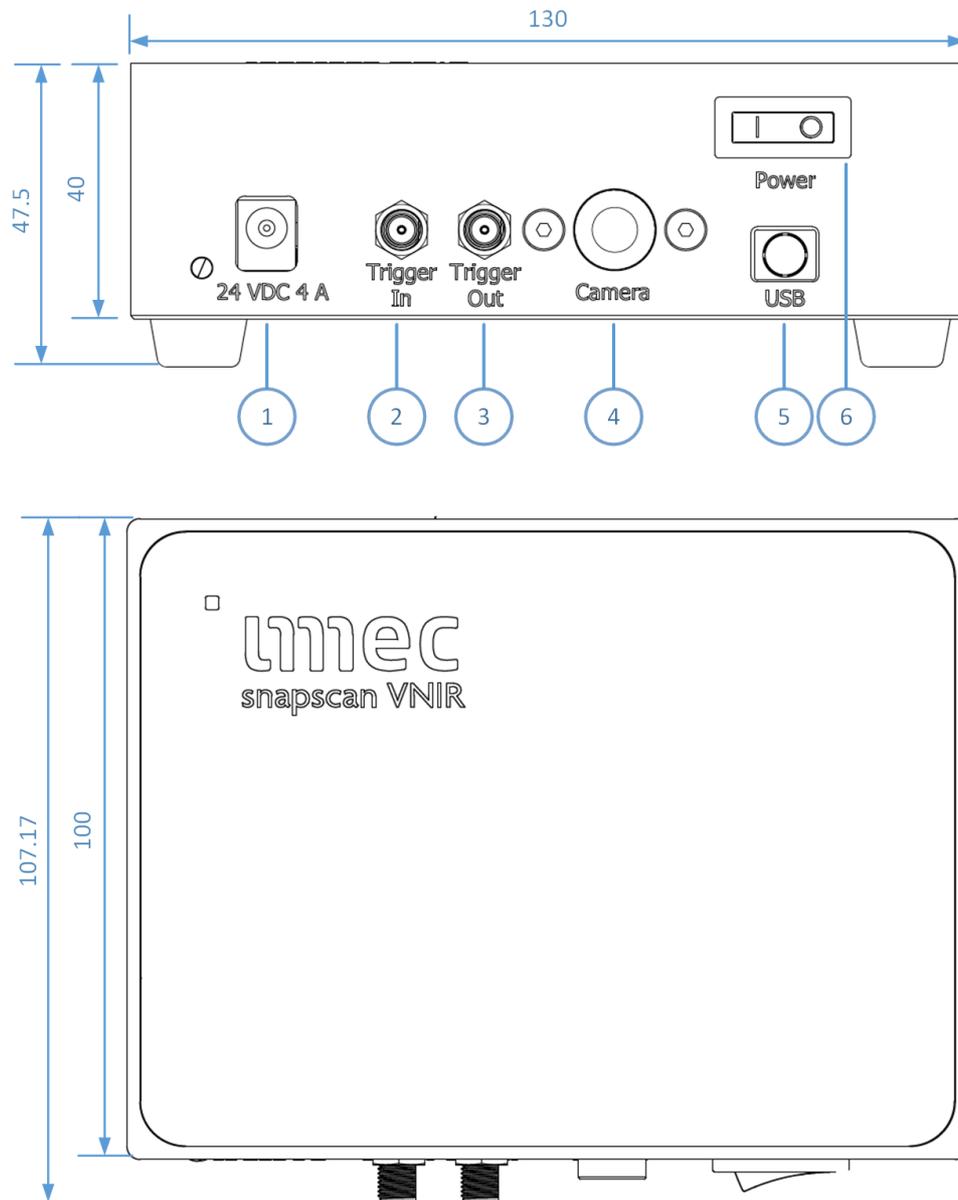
External dimensions of the snapscan controller and I/O in the back panel (all dimensions are in millimeter)
